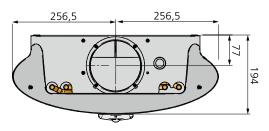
Dimensions ADRIATIC AWC Ellips, end view air connection
